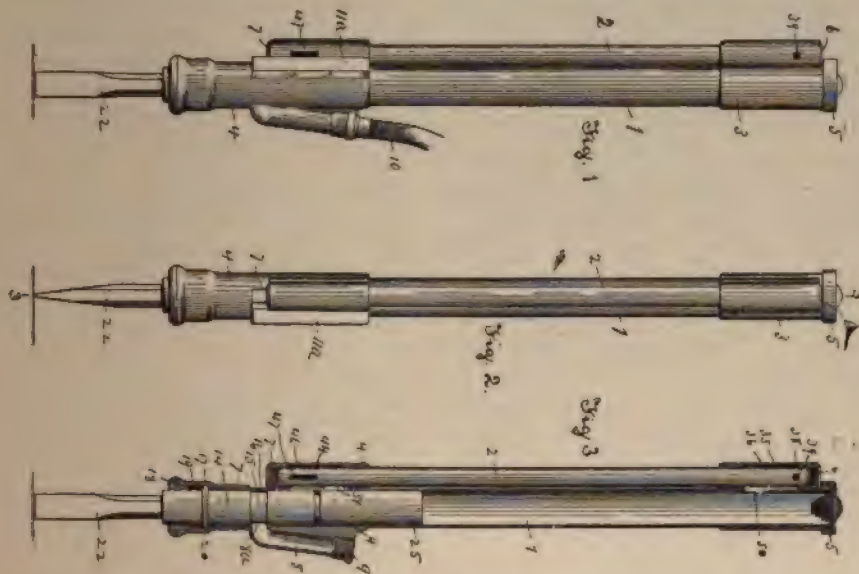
is a side elevation of the tool. Fig. 2 is a side elevation of the same, but representing the tool as turned one-quarter way from the position shown in Fig. 1. Fig. 3 is a central
